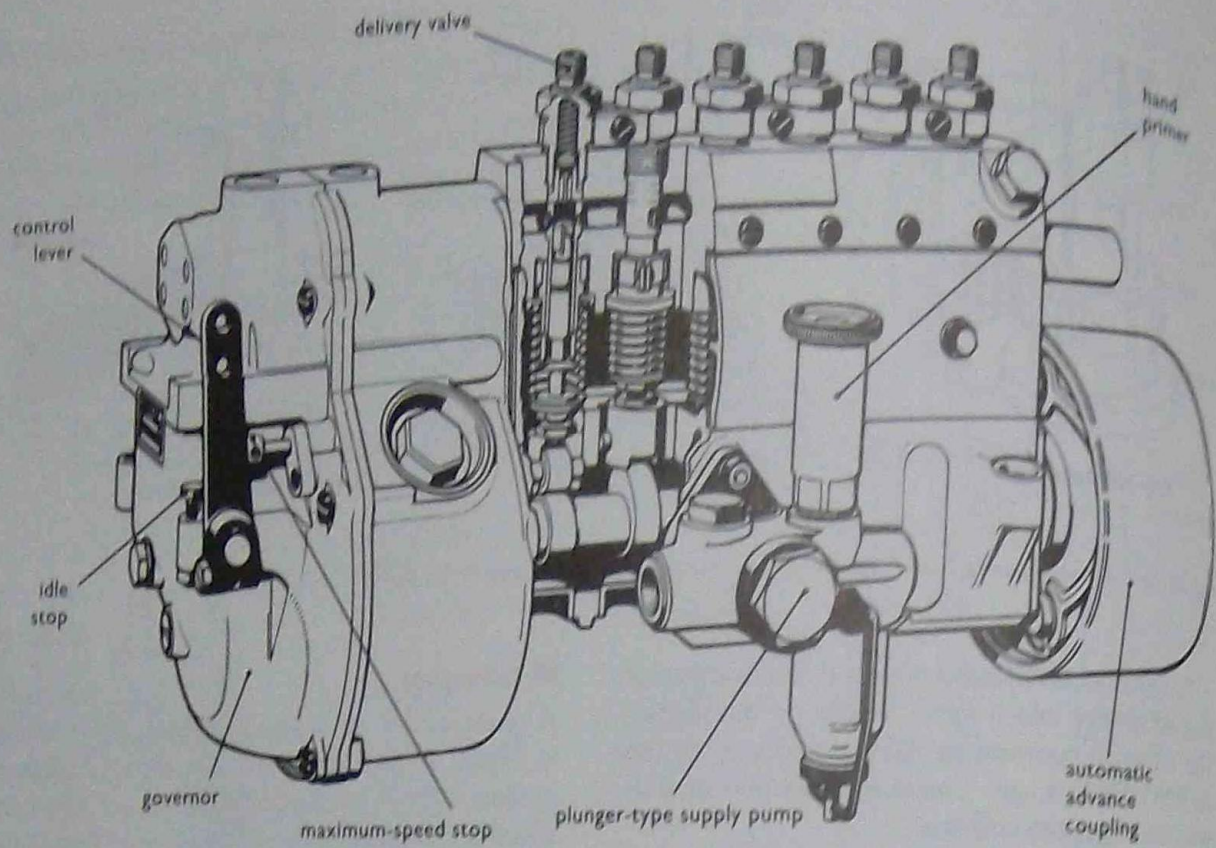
In-line injection pump with a mechanical governor BOSCH
